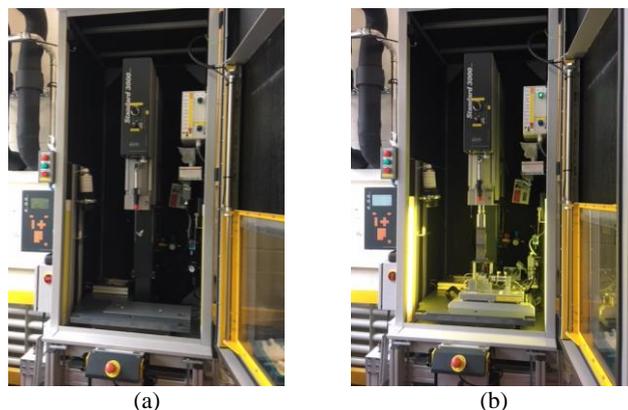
Ultrasonic welding machine (a) idle (empty), (b) with installed tools (Geberit Produktions AG, Jona, CH).
